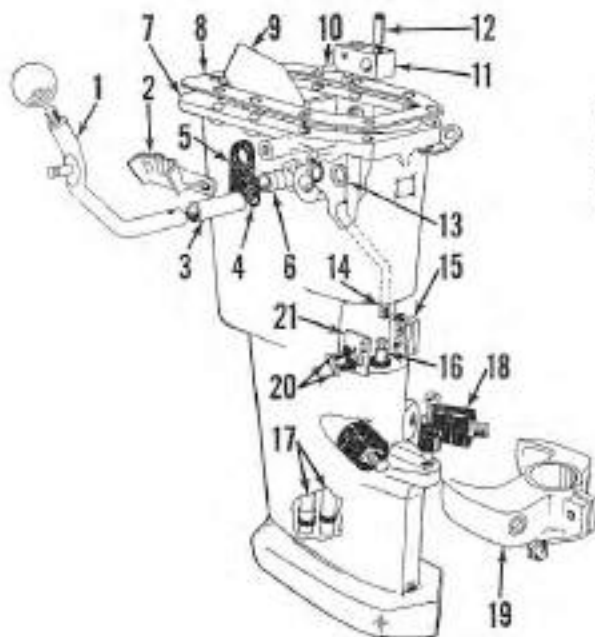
Exploded view of lower motor housing and associated parts used on Fleet Scott models.
